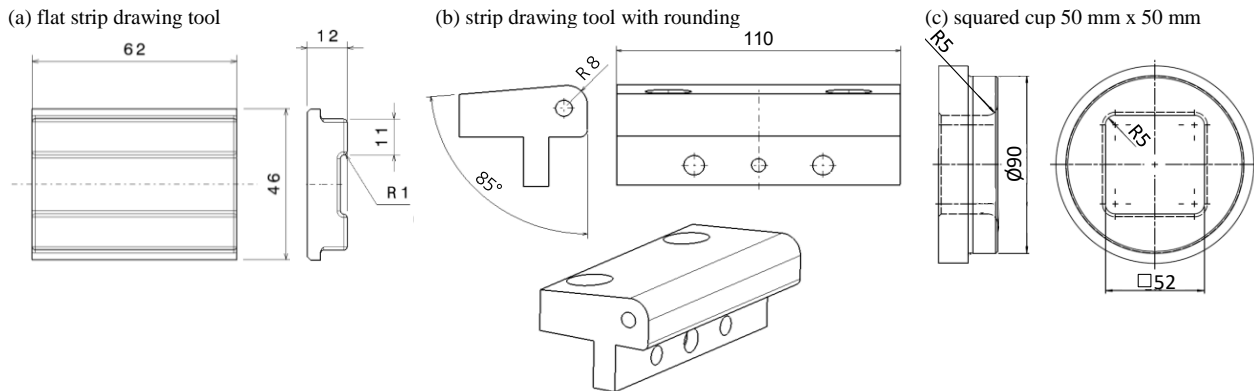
Overview of the test tools – strip drawing test (a, b) and deep drawing test (c)
